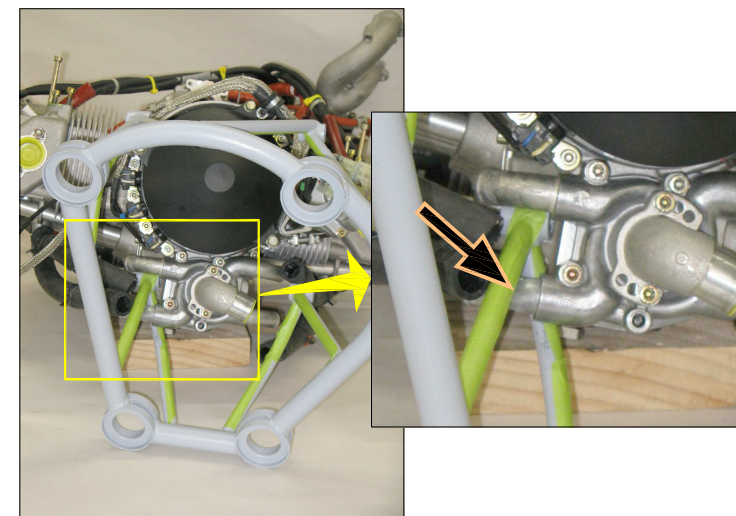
INSTALL ENGINE MOUNT: PART 1
